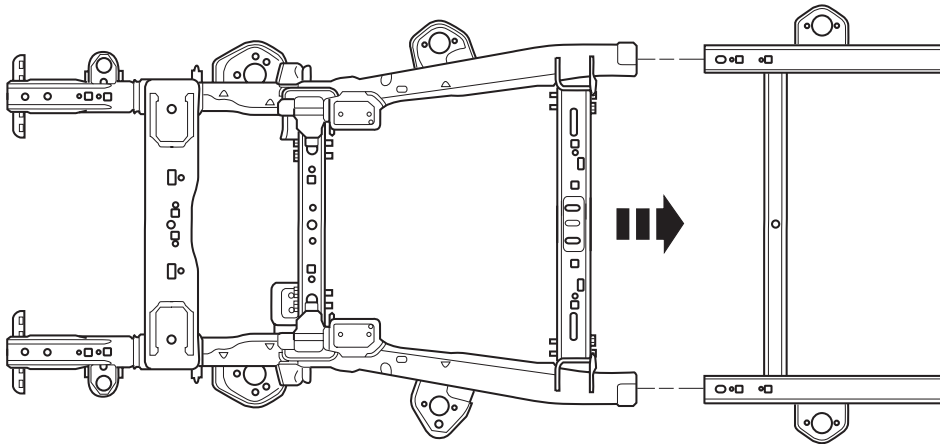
TYPICAL DISASSEMBLED VIEW
